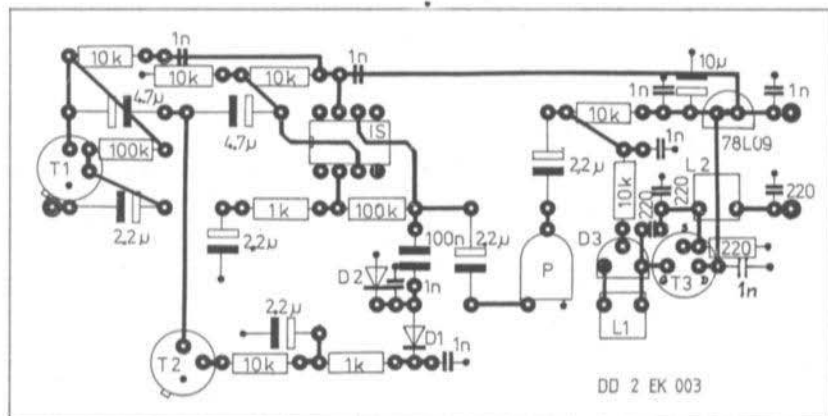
Component layout of sound-carrier board DD 2 EK 003
